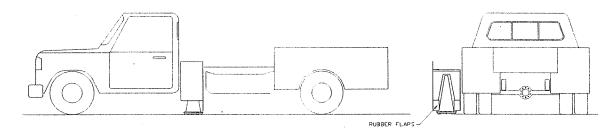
Rubber Flaps Used for Dispensing Cones
